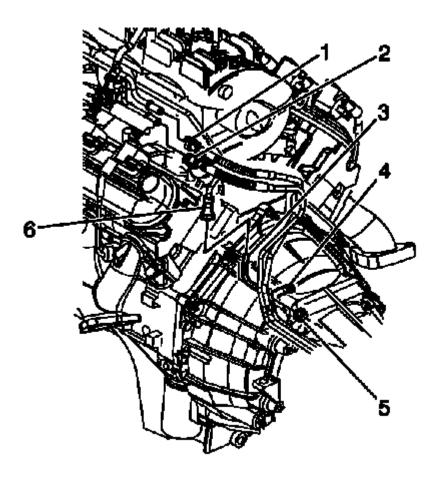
View Of Air Cleaner Outlet Duct Courtesy of GENERAL MOTORS CORP.
